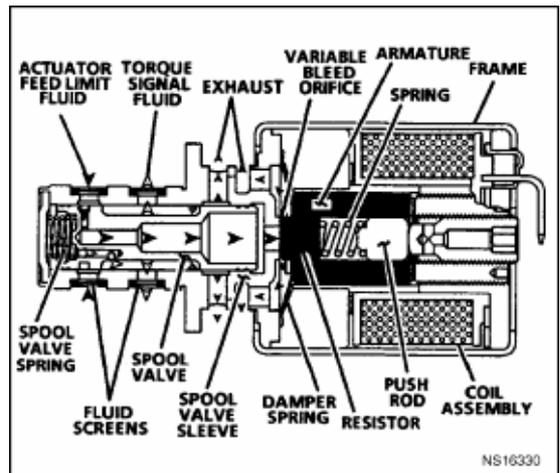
C2-1-70 Pressure Control Solenoid Cutaway View
